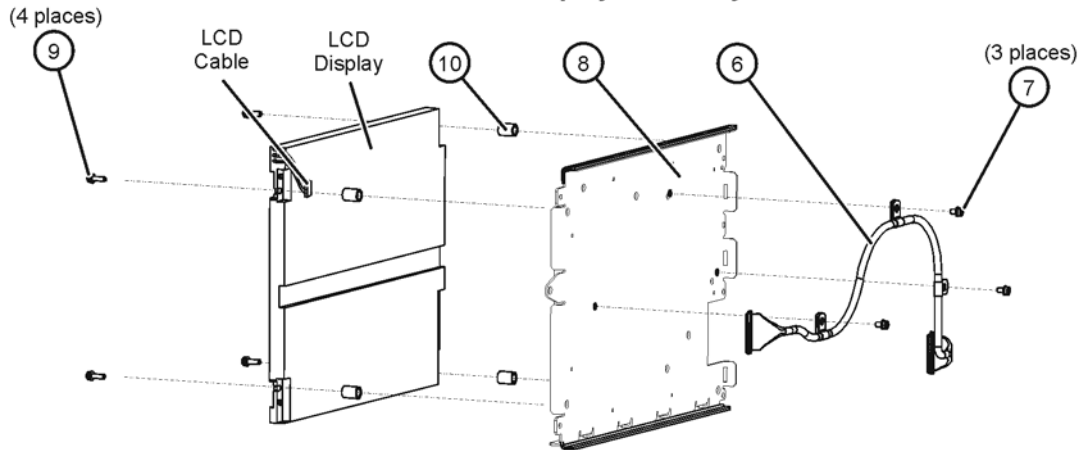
A3 Display Assembly and Touch Screen Removal-1
